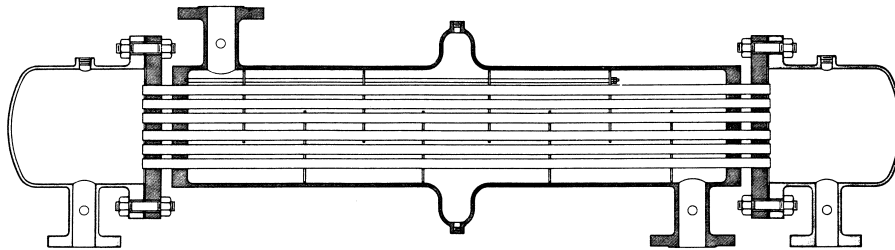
Line drawing of a standard type of shell and tube heat exchanger (courtesy of Patterson-Kelley Co.)
